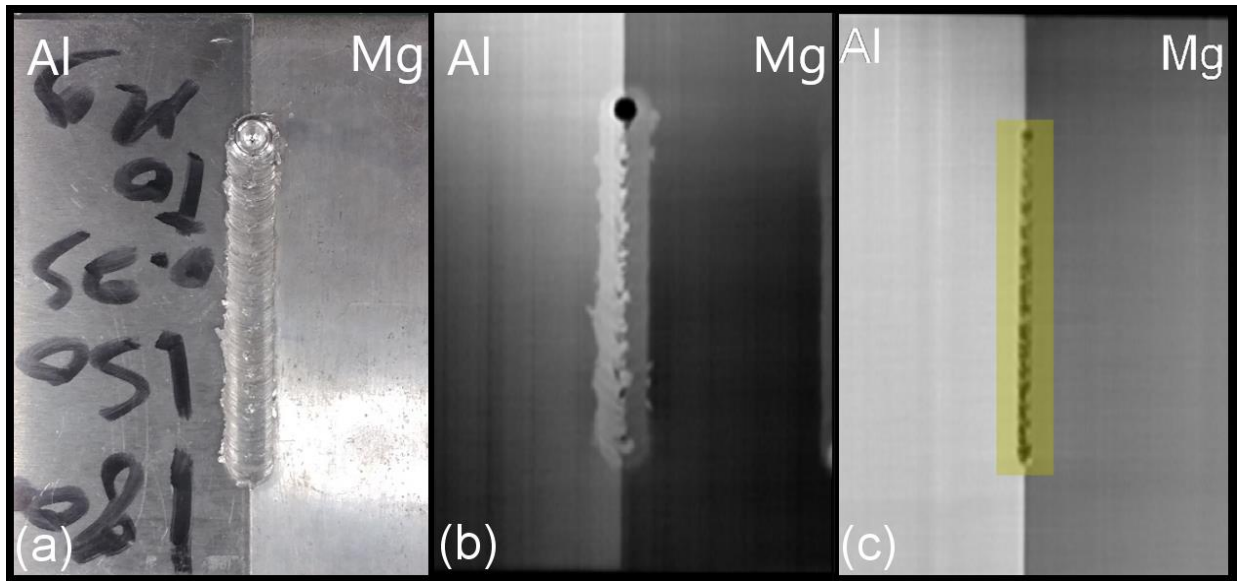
Weld sample (e), (a) photograph of the weld sample, (b) top view of the unsegmented CT image of the weld sample, (d) top view of the CT images of the sample showing in transparent yellow the location of the Otsu thresholding section.
